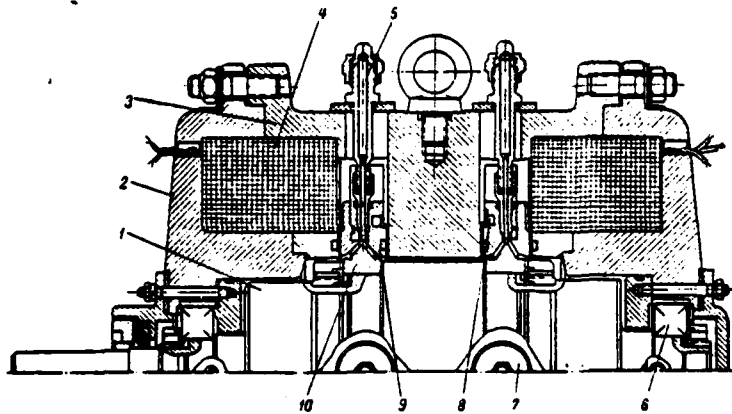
The longitudinal section of experimental generator. 1 - rotor; 2 - panel of stator; 3 - stator; 4 - field coil ($n = 950$); 5 - control branch; 6 - ball bearing; 7 - current-deflecting plug; 8 - channel of water cooling; 10 - rotating electrode.
